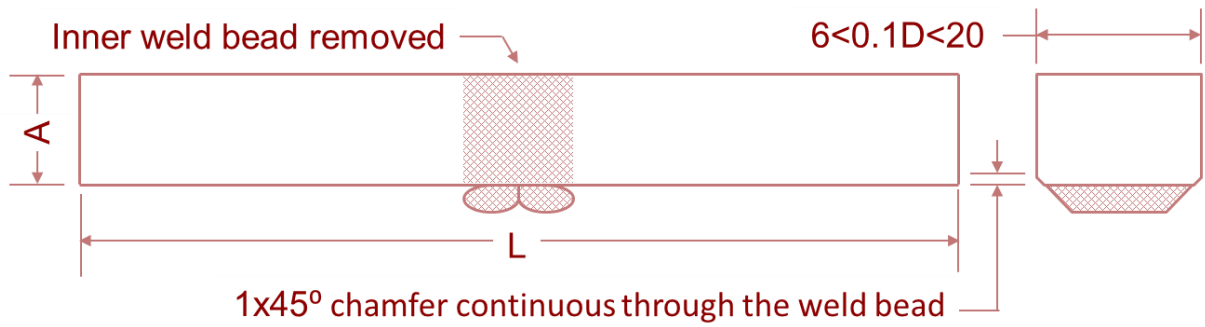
Geometry and dimensions of a three point bend specimen from EN 12814-1 (BS, 2000c)
